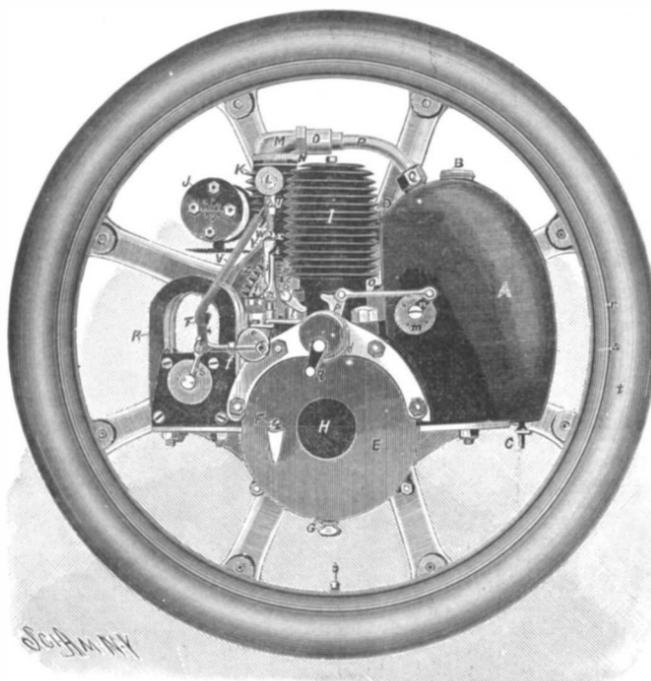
INTERIOR OF BACK WHEEL, SHOWING MOTOR.
